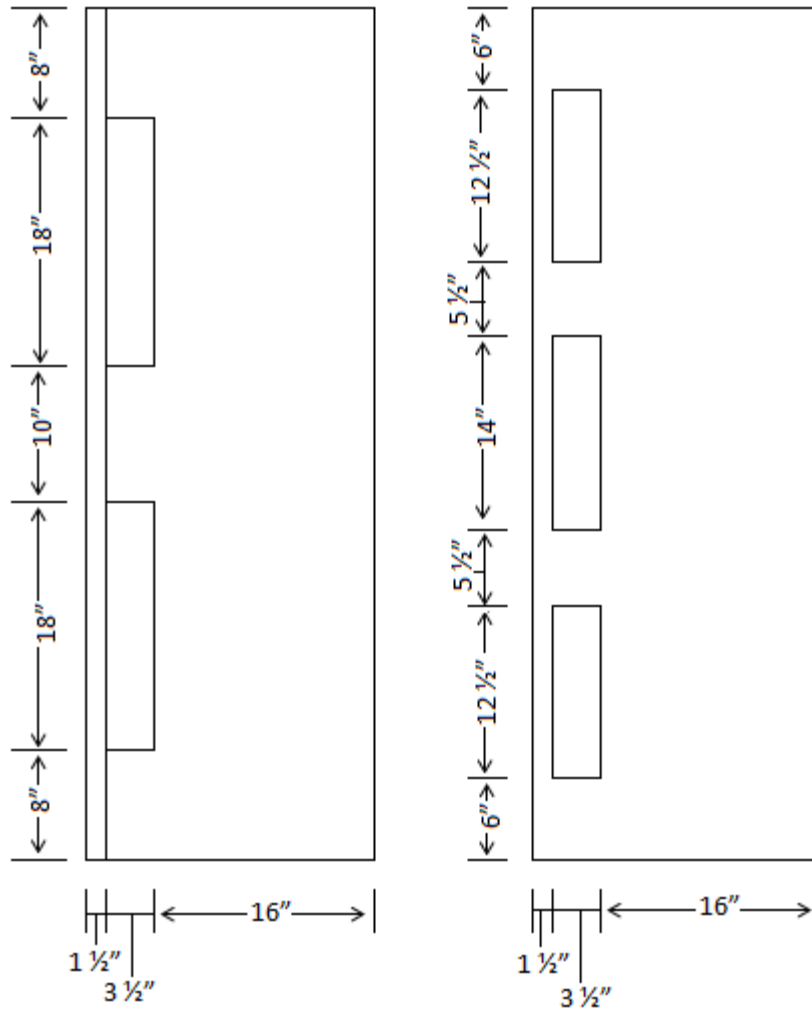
Left: top view of the holes in inner box right: bottom holes in inner box
